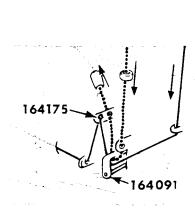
Threading Looper Take-up (Three-Thread Tight Stitch)
